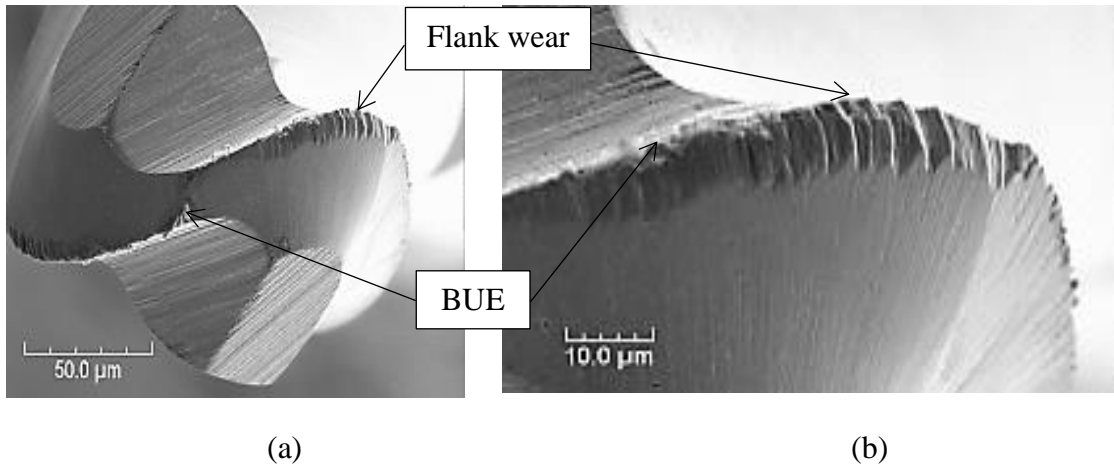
SEM Image of Uncoated  $\text{Ø}152\mu\text{m}$  Ball End Mill,  $V=24\text{m/min}$ ,  $ft=0.1\mu\text{m/tooth}$ , MQL, after Machining 12 mm on 304 Stainless Steel and 12 mm on 316L Stainless Steel: (a) Cutting End of the Mill; (b) Cutting Edge.
